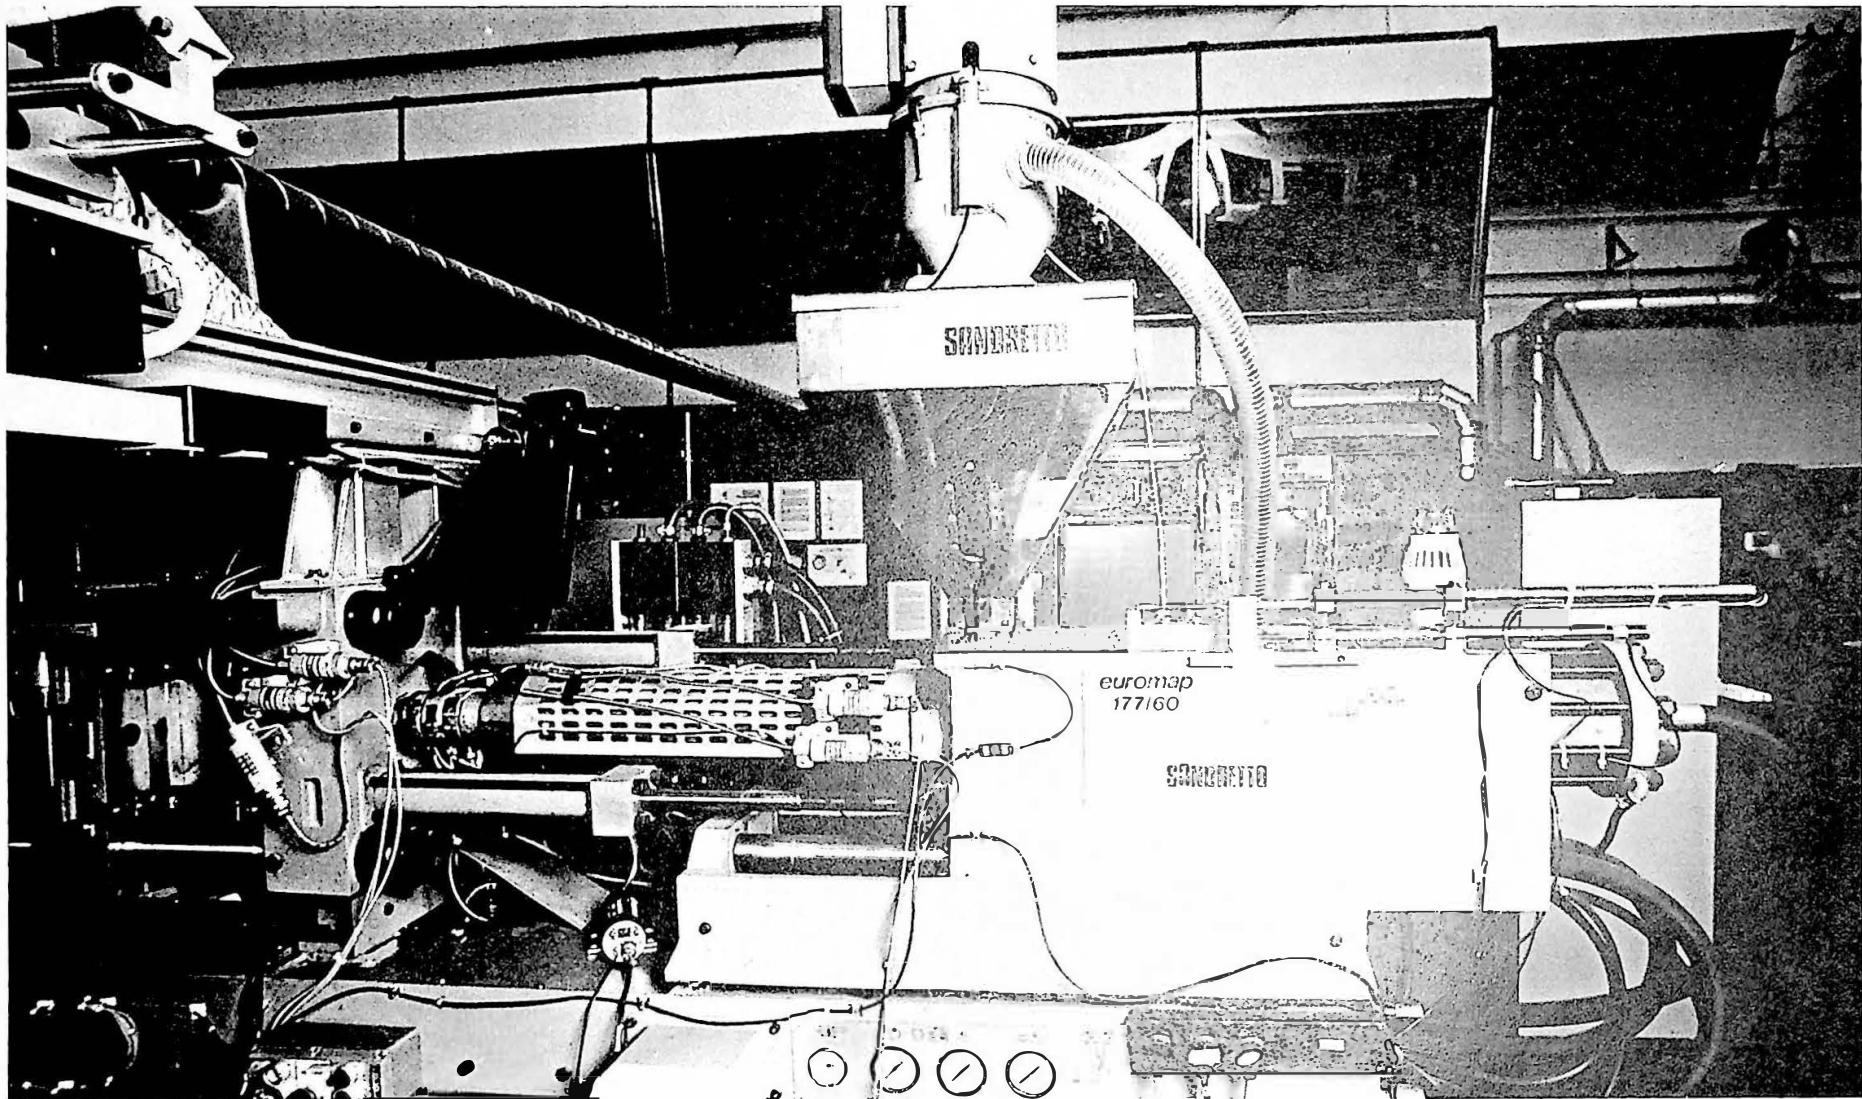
General view of instrumented injection unit of Sandretto 60 tonne injection moulding machine
